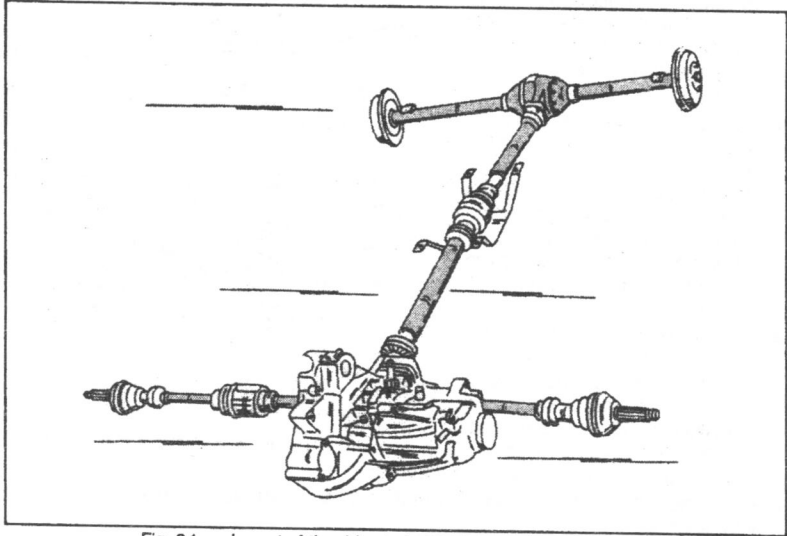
Layout of the drive train of a four-wheel drive vehicle.
